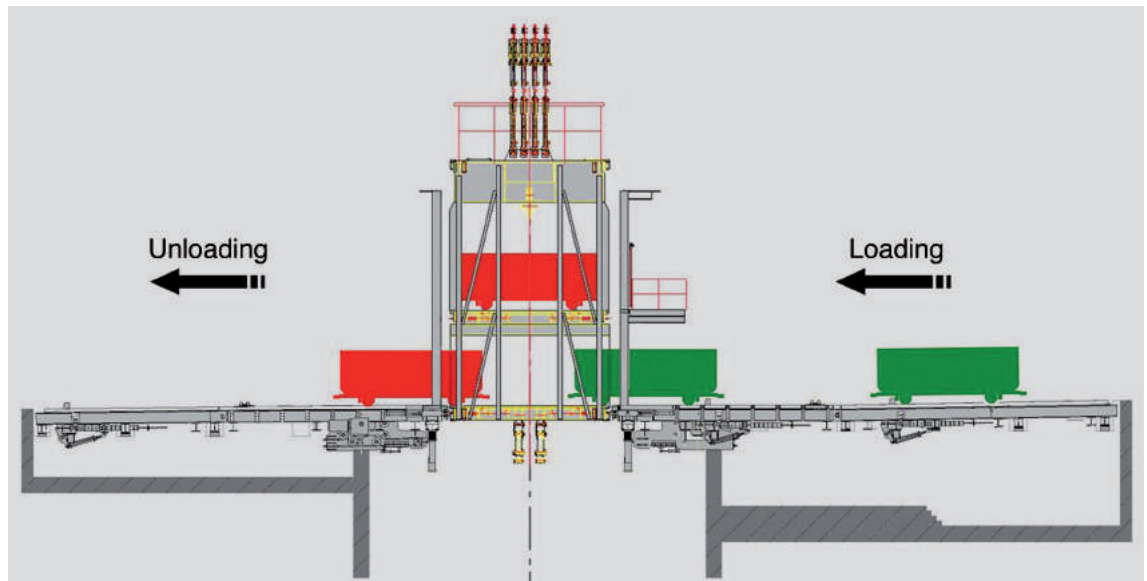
Charging units for loading and unloading the large cage with controlled guided car
